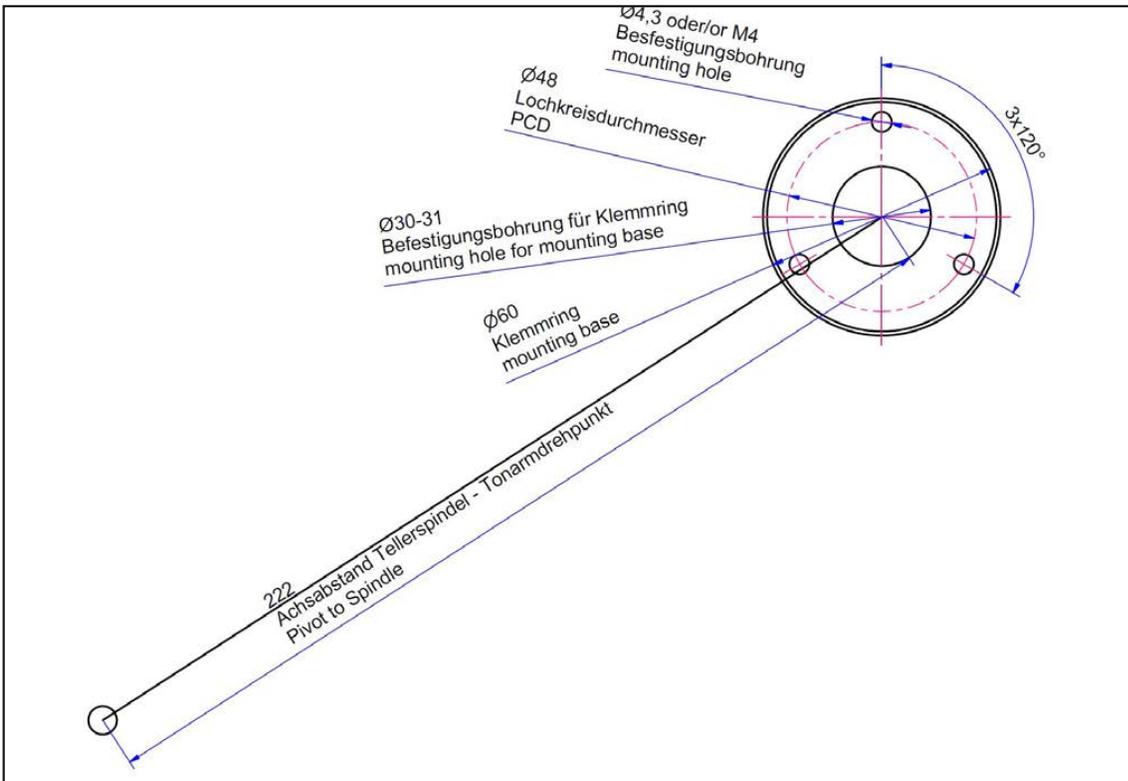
Mounting the aluminum clamping ring on a non-Clearaudio turntable
